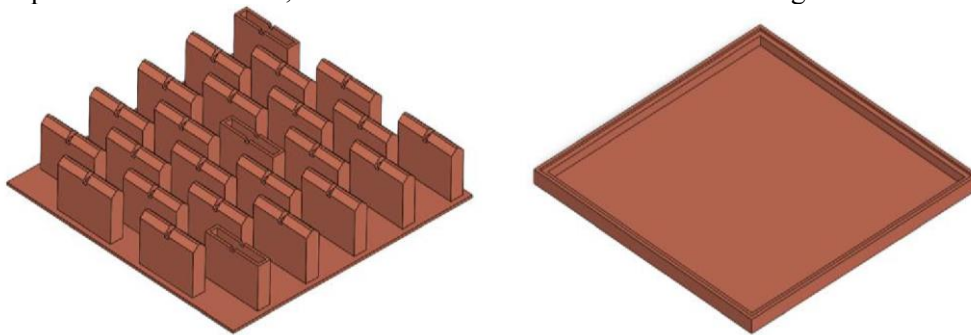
3D drawing of the two parts of the sample before the welding process: cover with fins (left) and base (right).
